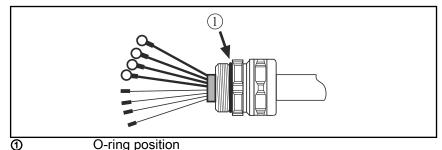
O-ring on an explosion-proof cable gland (example)
